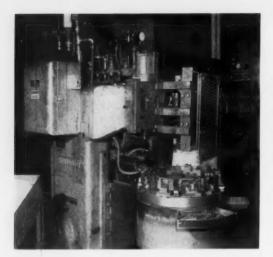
Index welder built up for welding three different assemblies.
